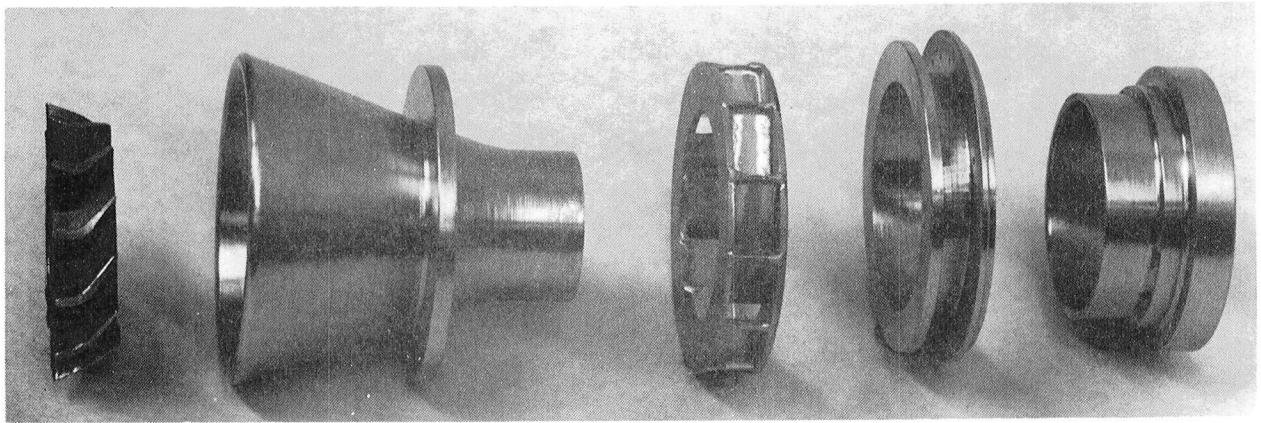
Pilot-Stage Swirl Cup - Exploded View.
